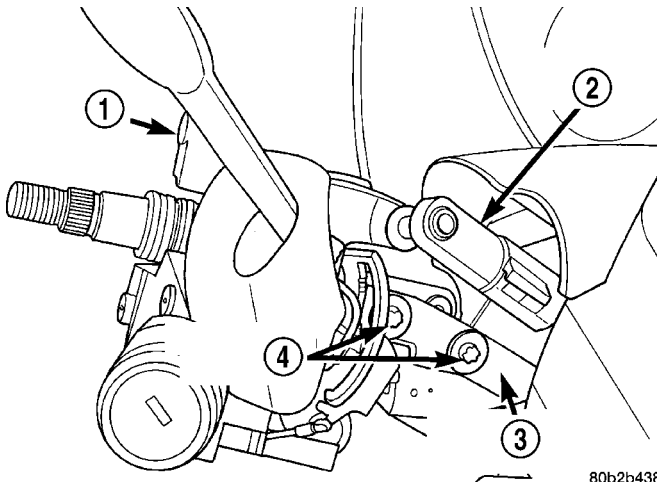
Shift Cable Bracket Mounting To Steering Column
